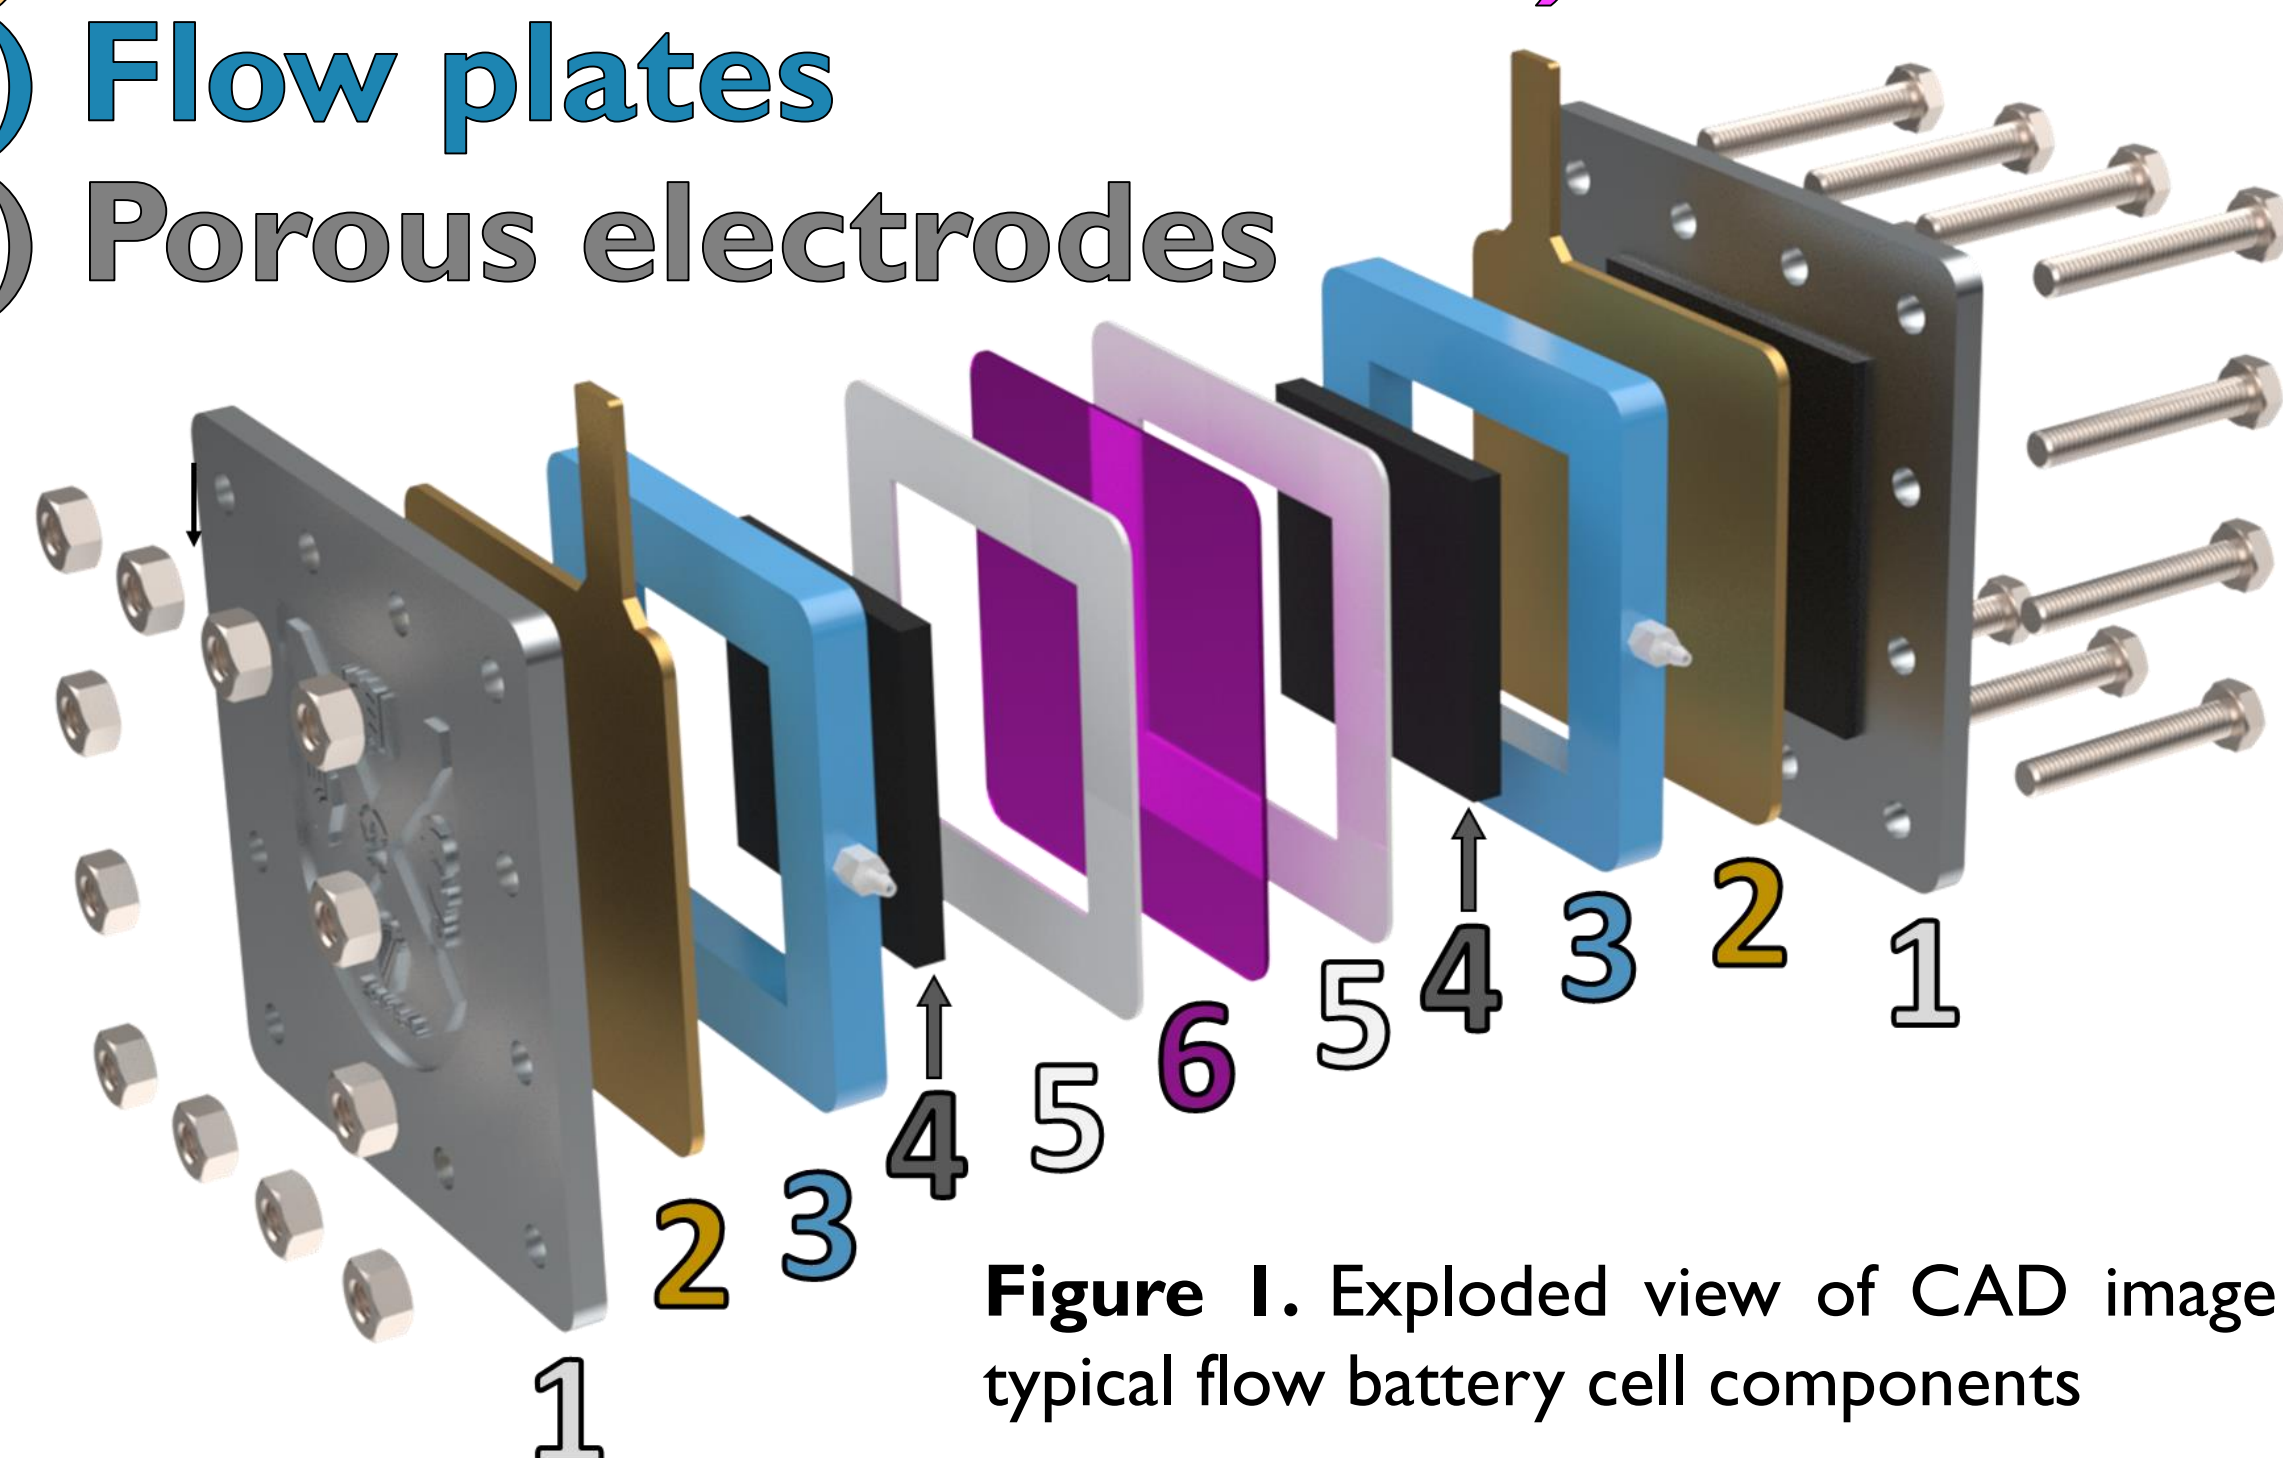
Exploded view of CAD image showing typical flow battery cell components
